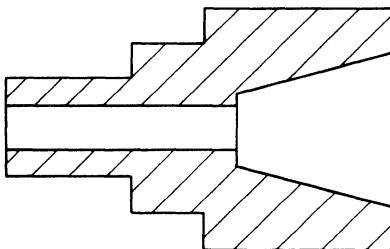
It may be more economical to have an inspector check a piece-part, such as that shown, than to have it done by the machine operator.
